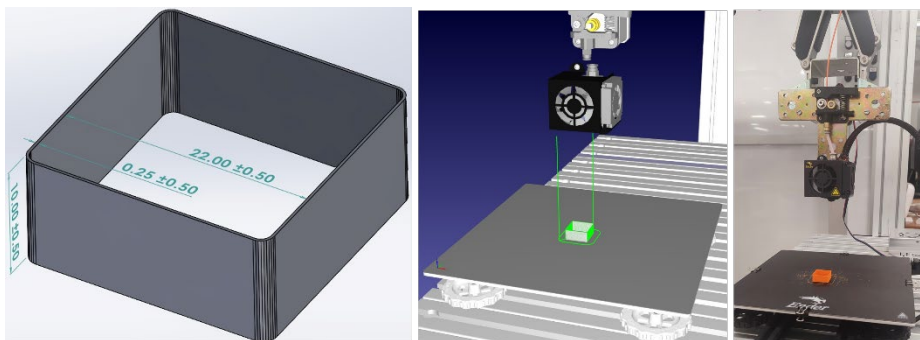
Case C: CAD model of the workpiece with dimensions (left), CAD model of the workstation (middle), and real system of printed object and devices (right).
